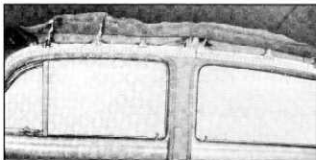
Attachment of Headlining Support Wires to Side Roof Rail
